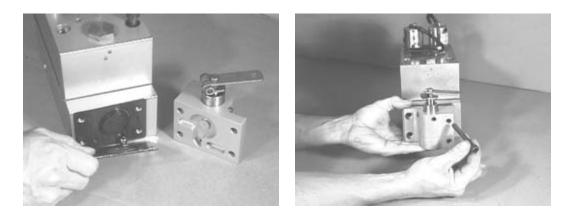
Installing Orifice Plate (left) and Trolling Valve Onto Valve Body (right)
